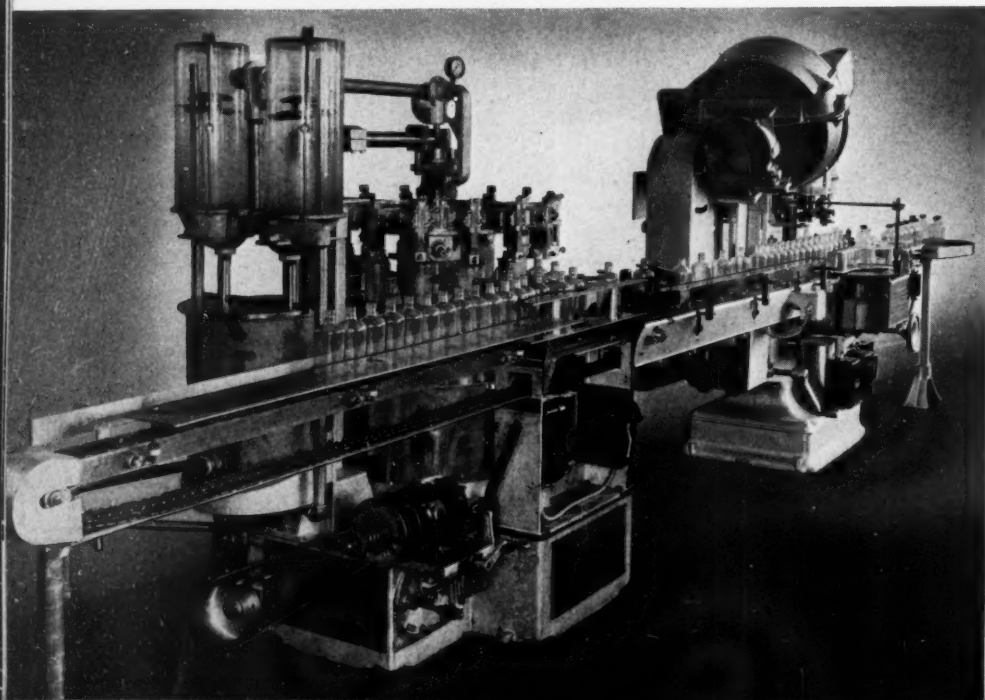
A platform conveyor chain operating between a rotary vacuum filling machine and a bottle capper. Cut tooth sprockets are used
